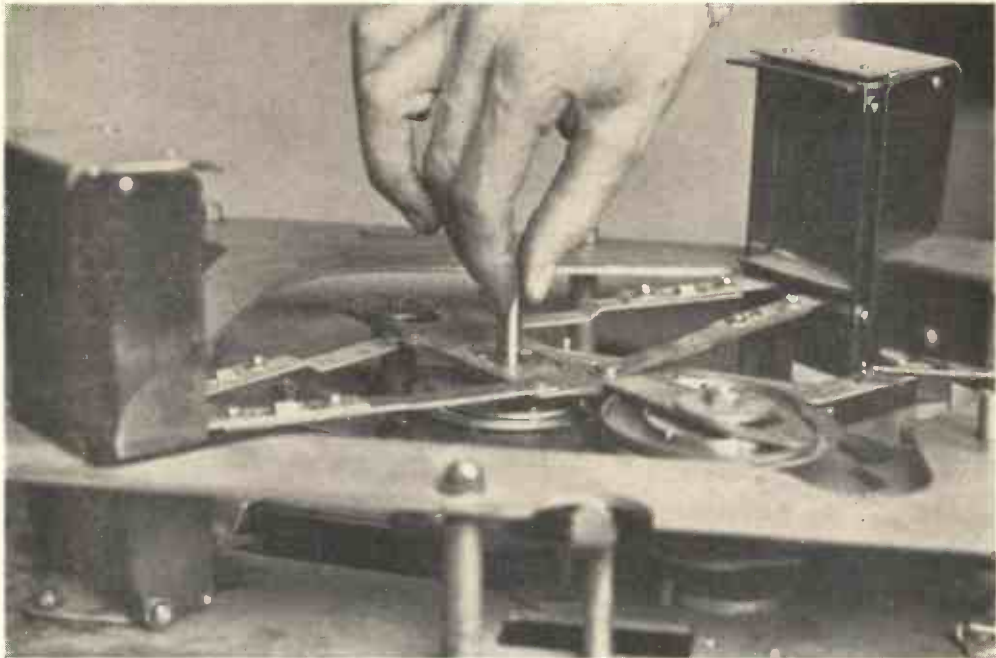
TESTING MOTOR SPINDLE FOR FREEDOM.
